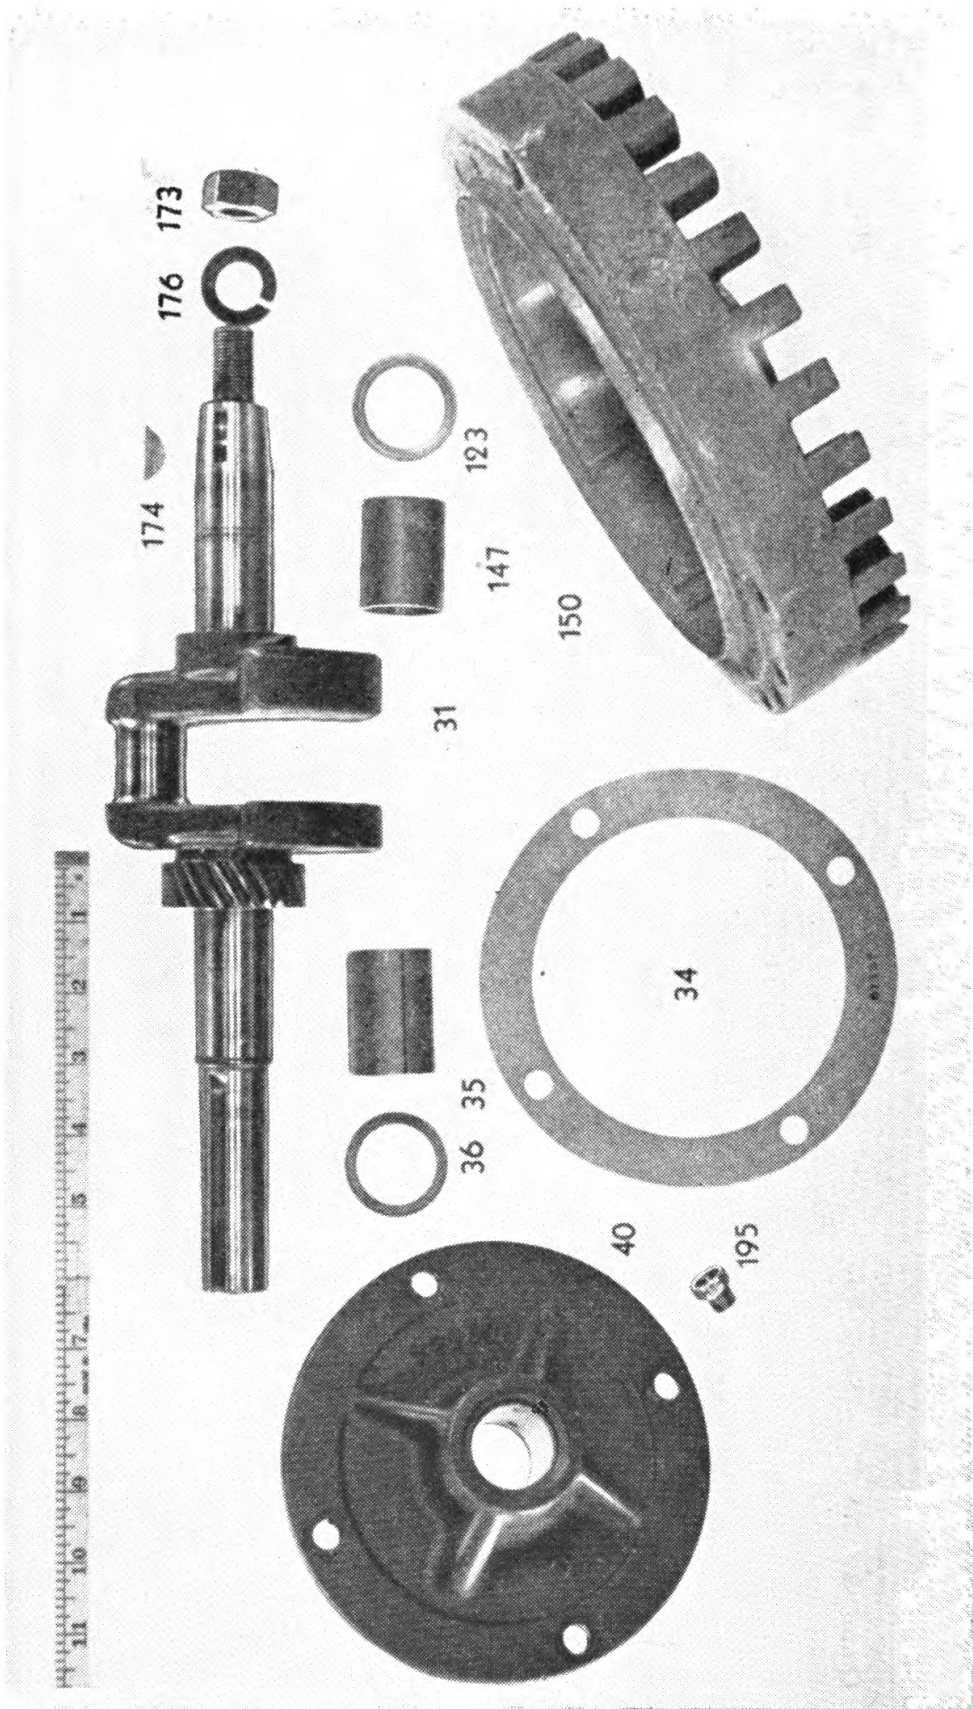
FLYWHEEL AND CAMSHAFT GROUP
